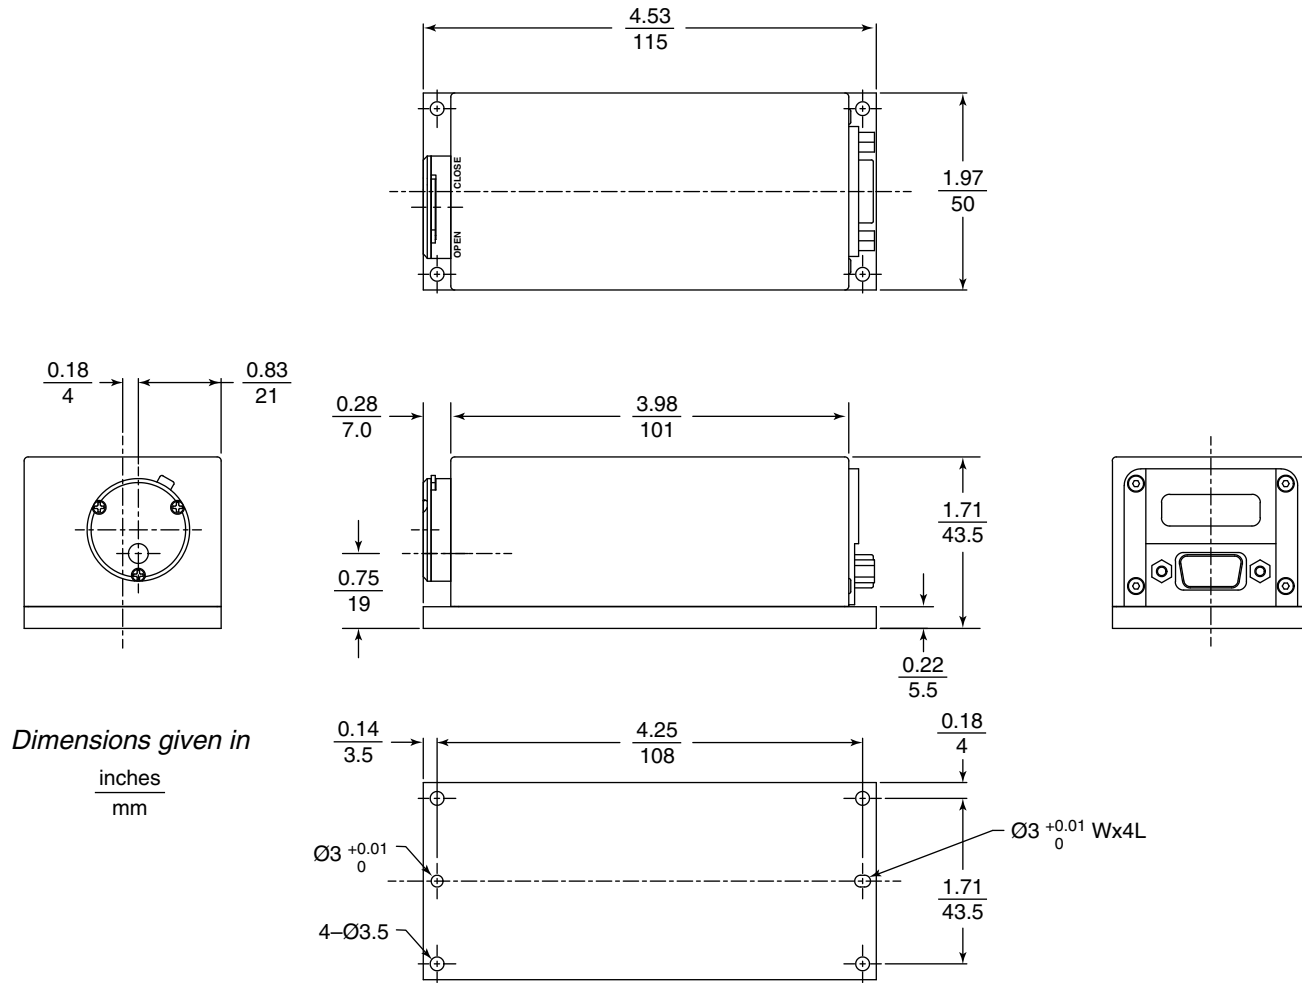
Outline Drawing of the *Excelsior DPSS-XC-CDRH* Laser Head
